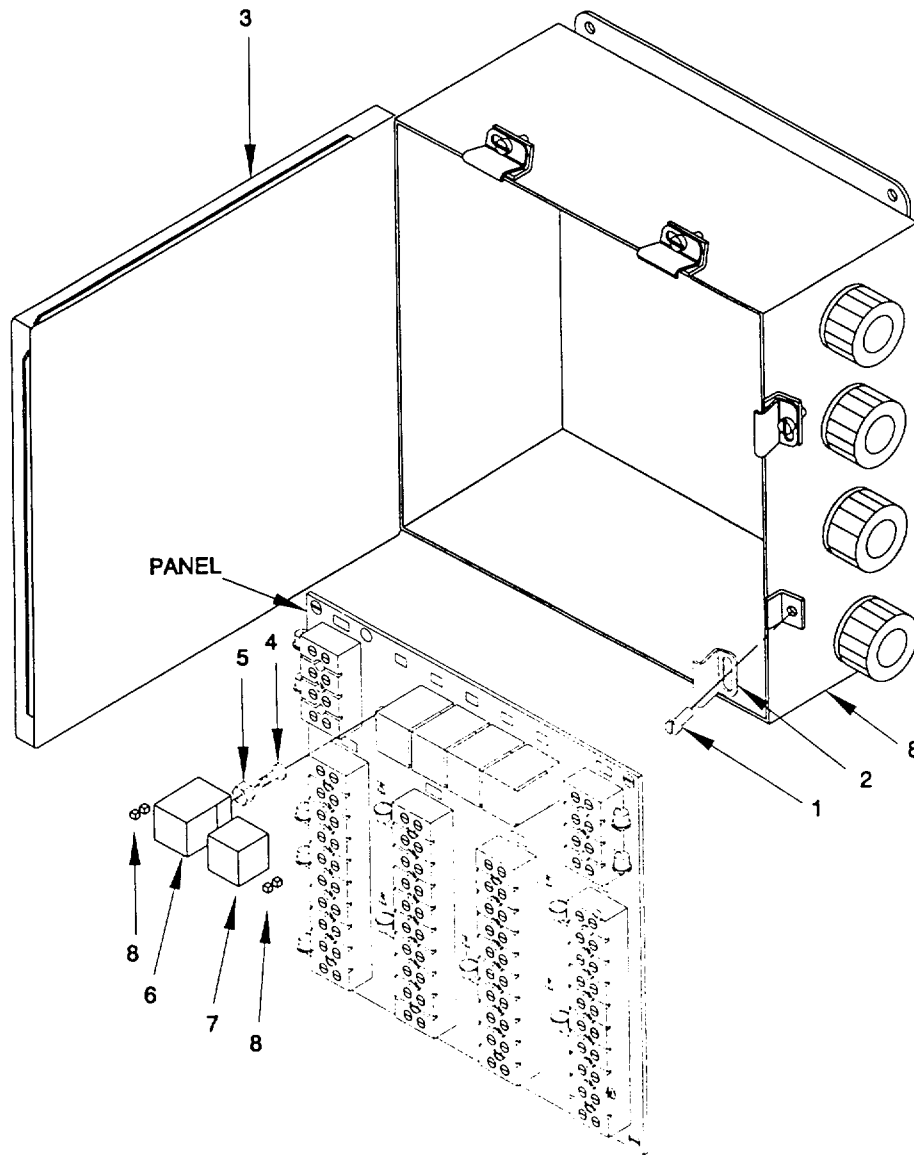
Relay, Relay Terminal, and Relay Socket, Bilge Pump Control Assembly 'AS'. Remove/Install
